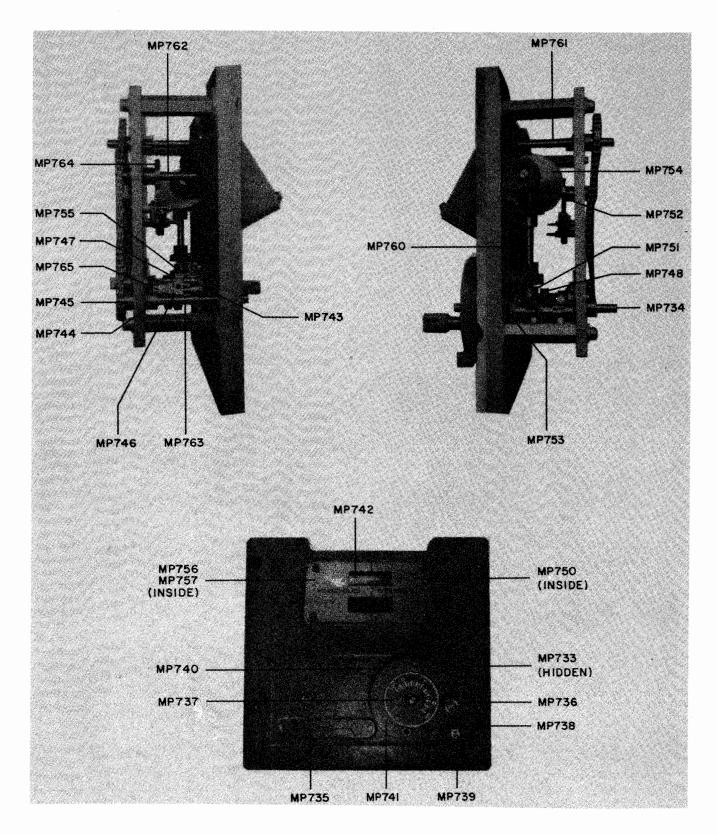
A. Electrical Frequency Control C-2764/WRT-2, Location of Parts in Gear Box, Sets, Serial Nos. Al thru A178, D1 thru D327.
